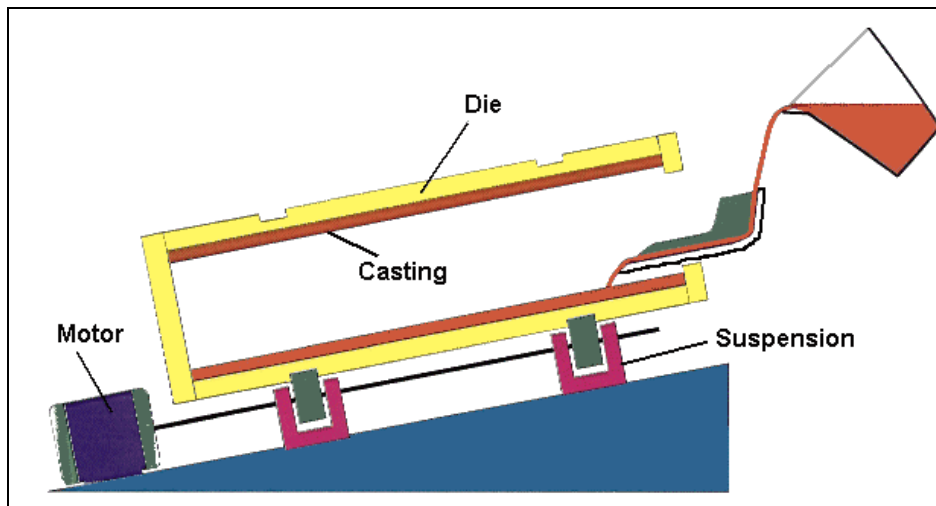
Schematic representation of a centrifugal casting machine [179, Hoppenstedt, 2002]
